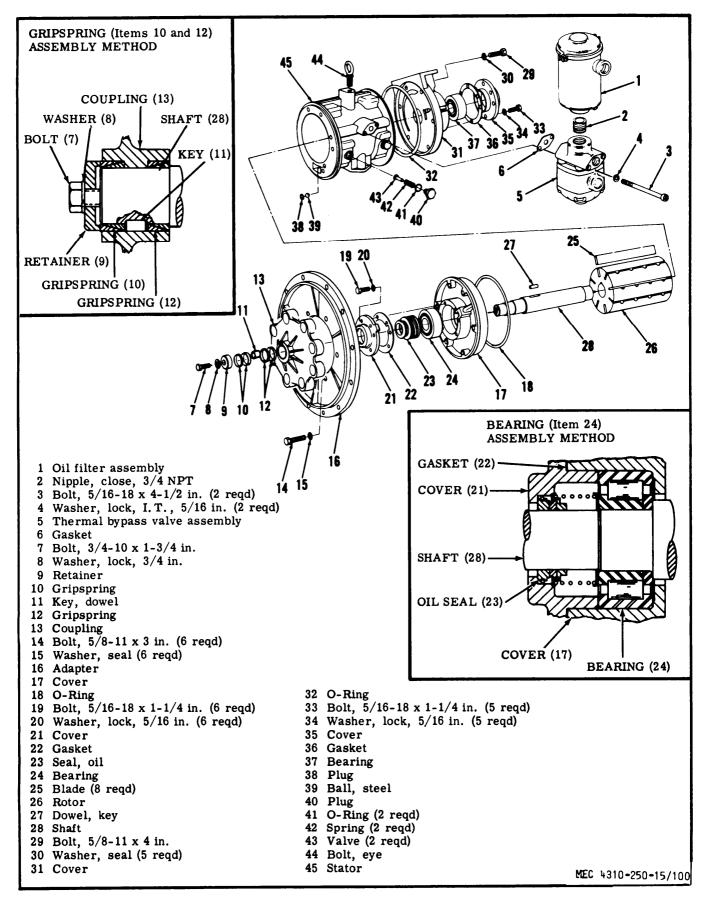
Air Compressor Assembly, Disassembly and Reassembly.
